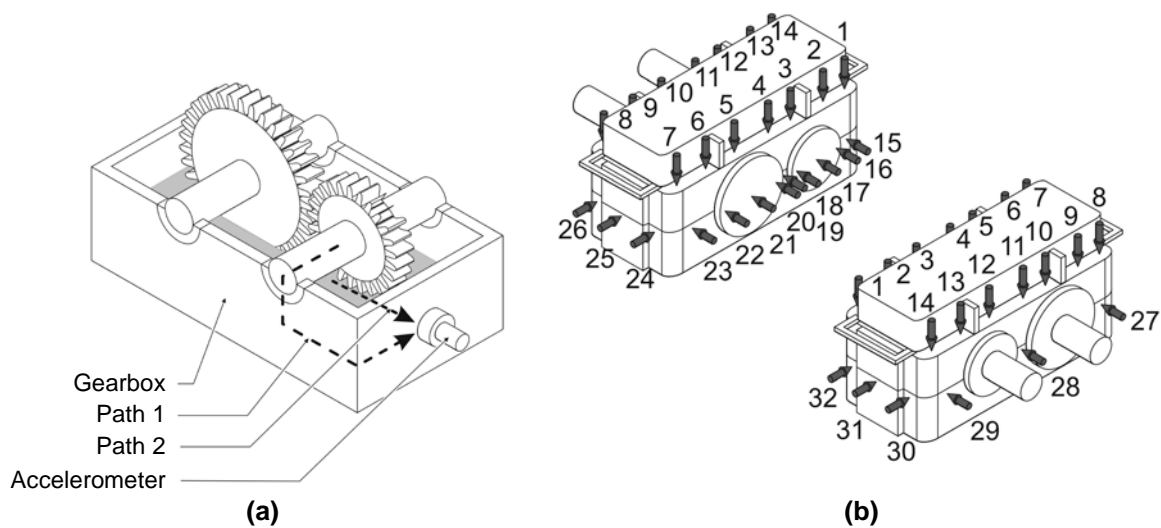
(a) Sketch of main vibro-acoustic transfer paths in gearbox; (b) visualization of measurement points location used in experimental analysis of a test gearbox.
